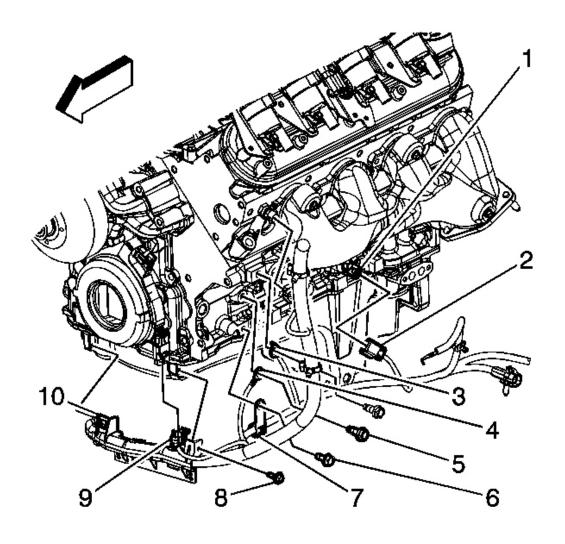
Engine Wiring Harness Electrical Connector & Crankshaft Position (CKP)
